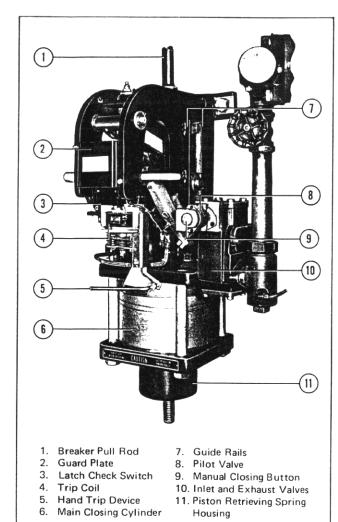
Type AA-10 Mechanism with Westinghouse Control Valve
